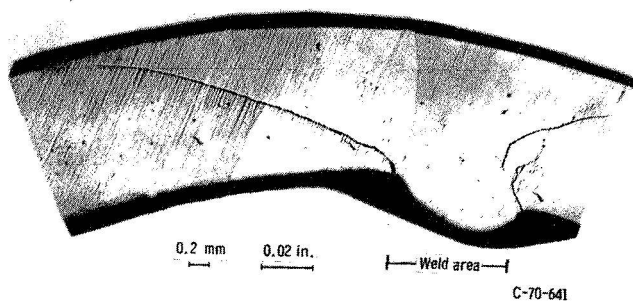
Section of typical ball on which no surface spalls were evident, showing cracks originating at the weld area. Section taken parallel to and through running track. Ball from bearing 215-1-H.
